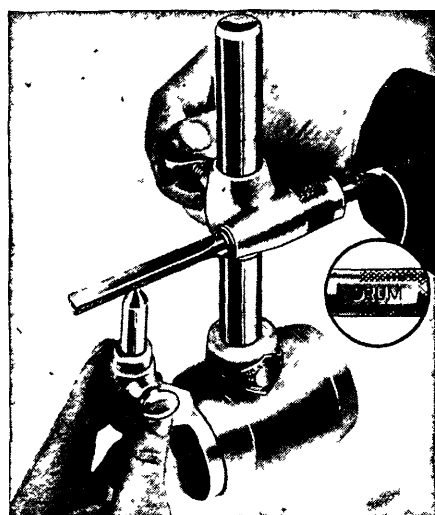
Adjusting brake gauge arbor to diameter of brake drum as measured with drum gauge
